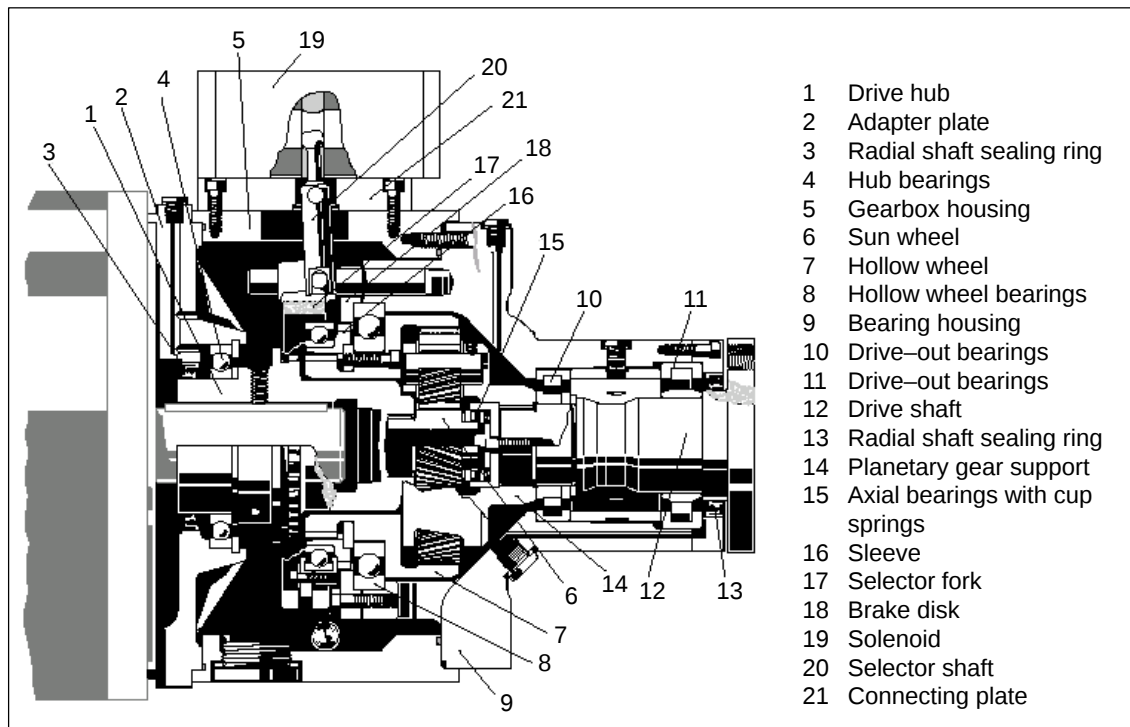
Gearbox design for 1PH4, SH 100–160
